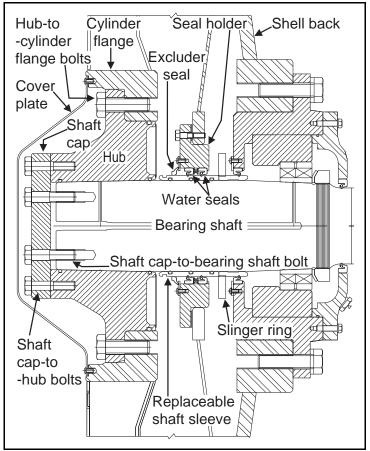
(MSSM0275AE) Overview of Main Bearing Showing Water Seal Components
